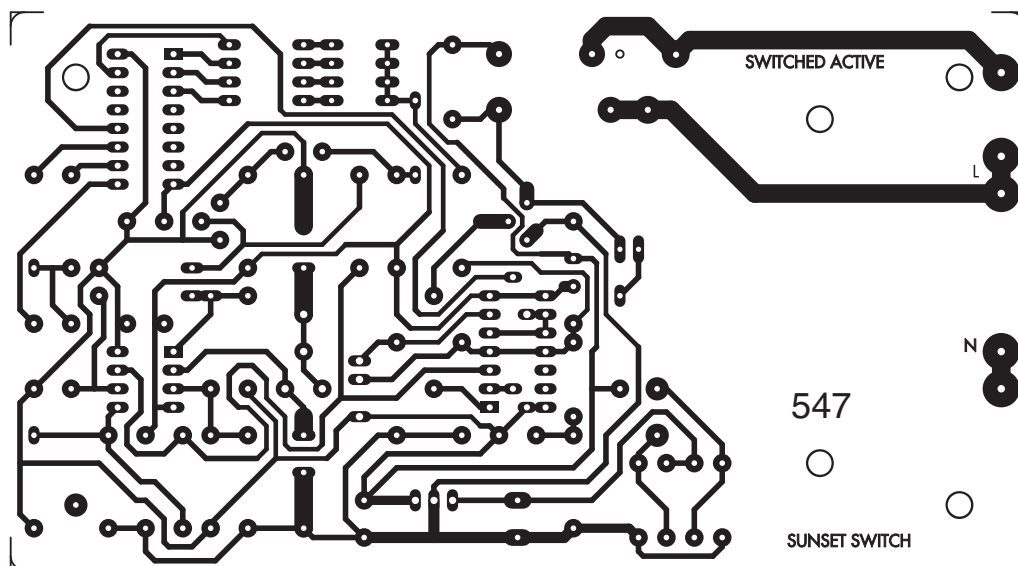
this is the full-size etching pattern for the PCB board. Check your board carefully against this pattern before installing any of the parts.
